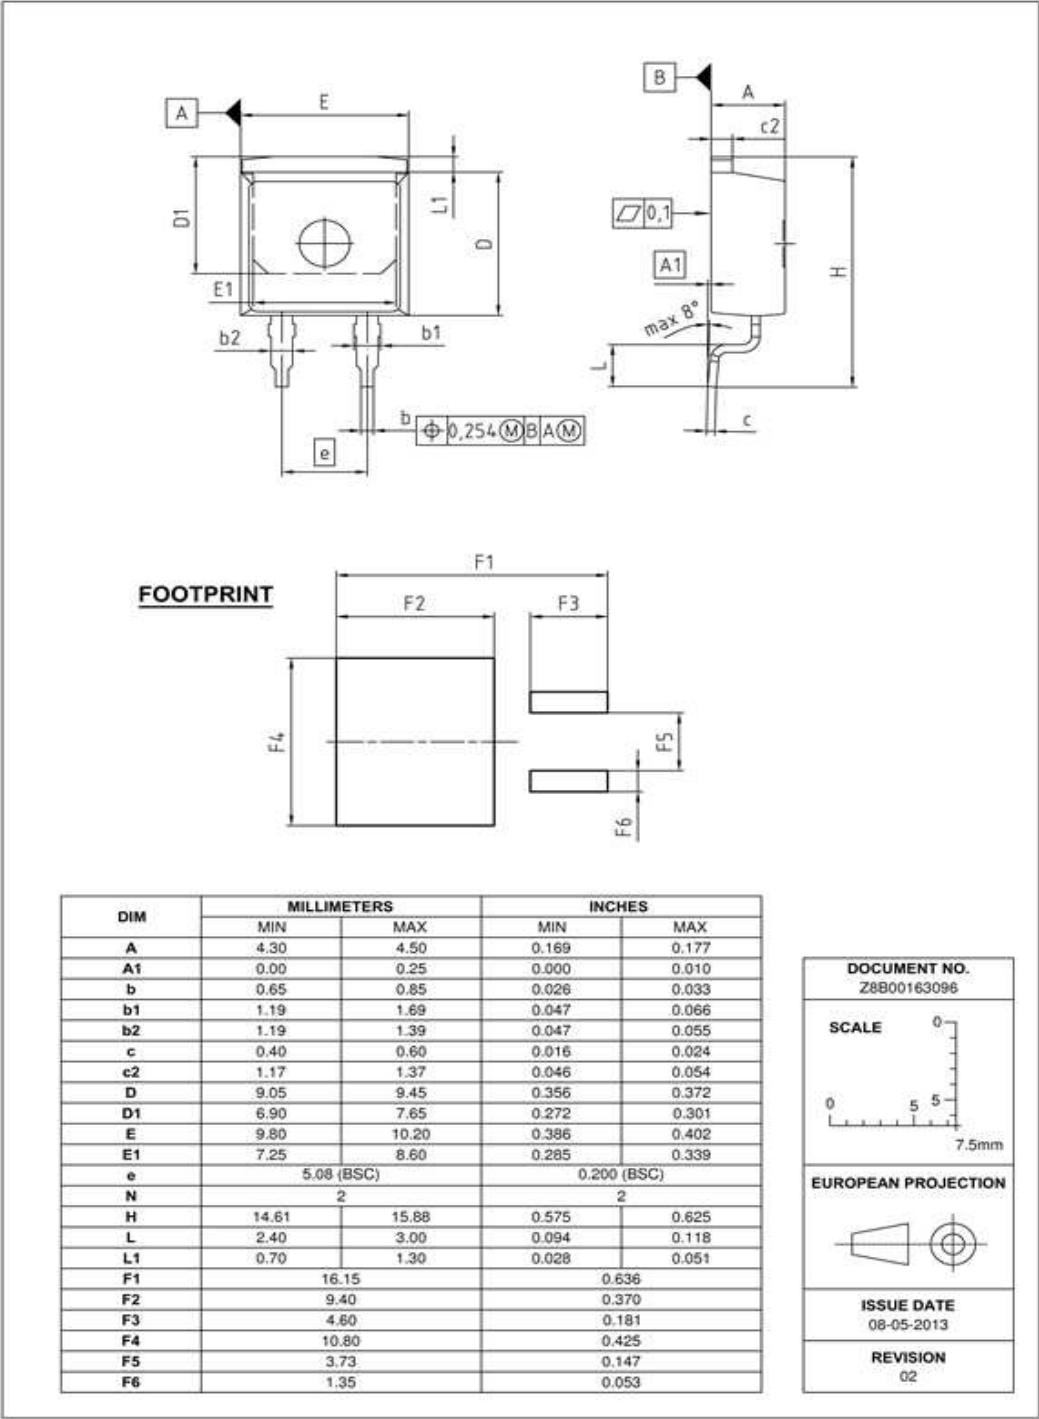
Outlines TO-263-2, dimensions in mm/inch
